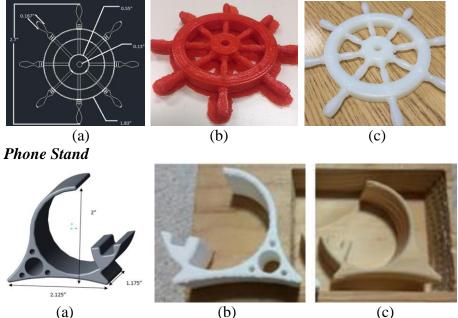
(a) CAD Design; (b) MakerBot 3D Print; and (c) Roland Mill CNC Part
